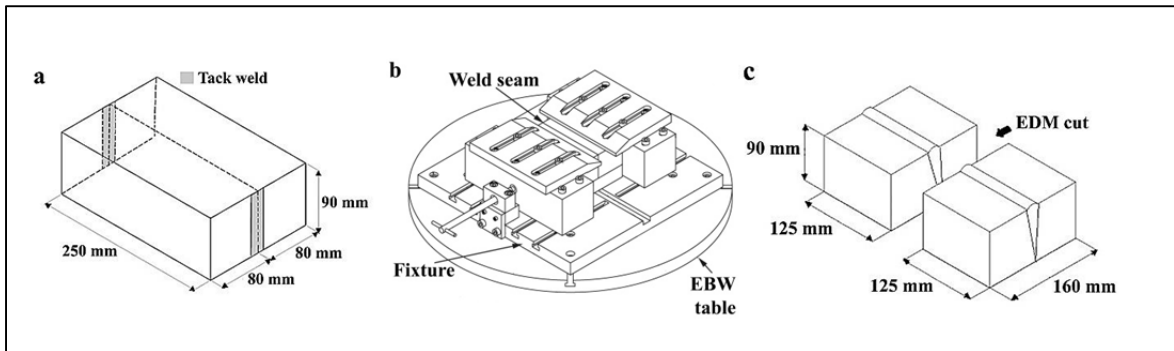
Schematics showing details related to assembly before welding and sectioning for residual stress measurement (a) the two coupons tack welded on each end, (b) the clamping fixture mounted to the worktable of the EBW system, and (c) Sectioning of the welded assembly by EDM along a transverse plane at the mid-length position
